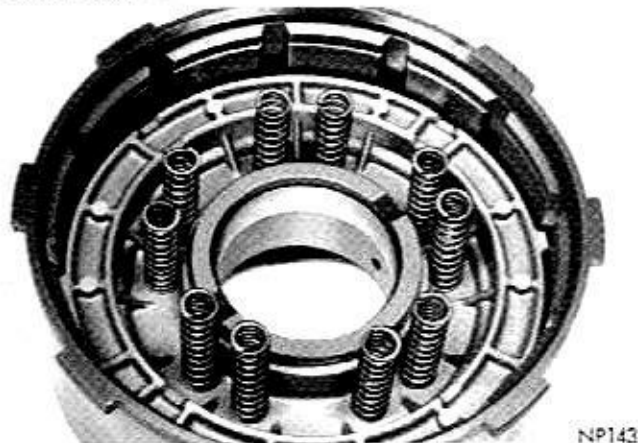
Front Clutch Piston Return Spring Location (10 Springs)
